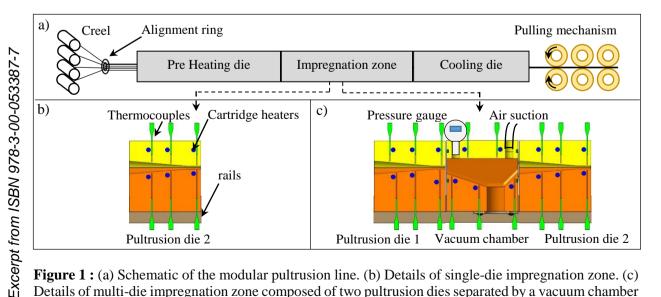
(a) Schematic of the modular pultrusion line. (b) Details of single-die impregnation zone. (c) Details of multi-die impregnation zone composed of two pultrusion dies separated by a vacuum chamber Dies were coated with 5 layers of sealing agent (SEALER GP, Chem-Trend LP) and 5 layers of release agent (CHEMLEASE 70-90 EZ, Chem-Trend LP). Table 2 presents the different parameters sets for pultrusion. One experiment was conducted for each impregnation zone configuration described in Fig. 1. The different temperature and pressure parameters in the multi-die configuration were carried on during the same pultrusion experiment. Using an estimated PLA melt density of 1.1 g/cc for both 200 °C and 220 °C, resin overfilling is determined as a pourcentage of the cross-section area of pultrusion die 2. It is 19.3% under the single-die configuration. In the multi-die configuration, it is distributed as 9.8% in pultrusion die 1 and 9.5% in pultrusion die 2.
